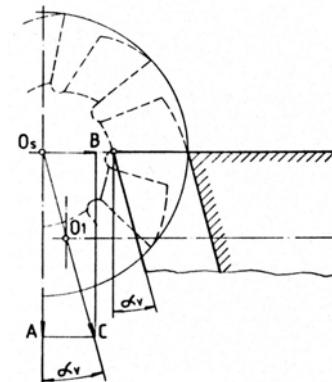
The fabrication procedure of the cutting-wheel using a gear hob – module.
